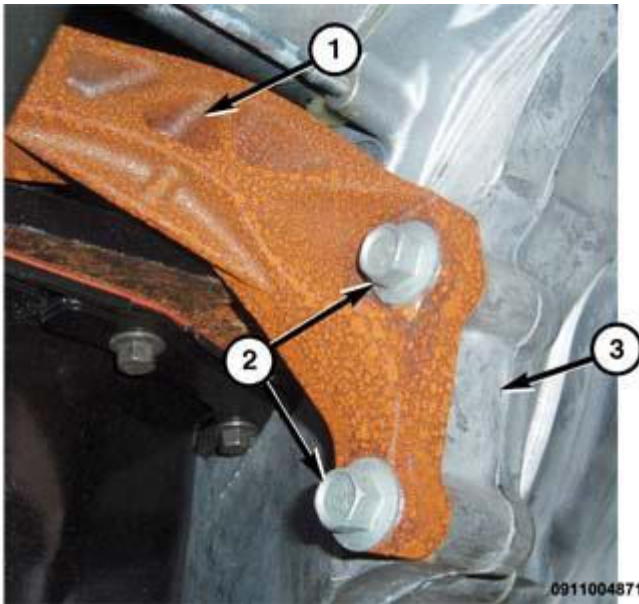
Left Engine Block Stiffener, Bolts & Engine Block
